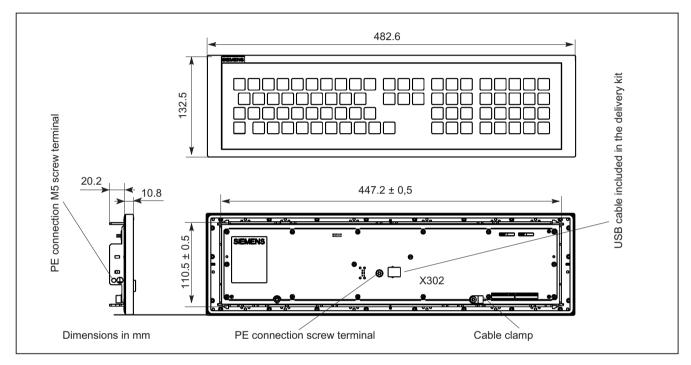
Front, side and rear views of CNC full keyboard KB 483C
